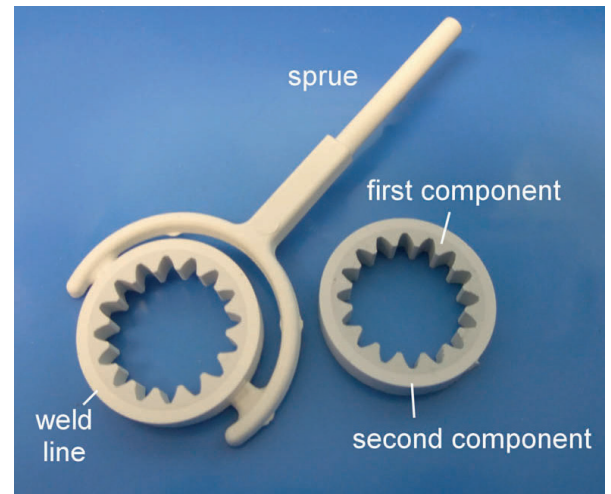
Gear wheel in green stage with sprue; perpendicular to the gates two weld lines form
